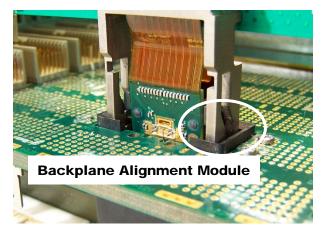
Line Card Partially Inserted into the Optical PCB (source: Samtec)
